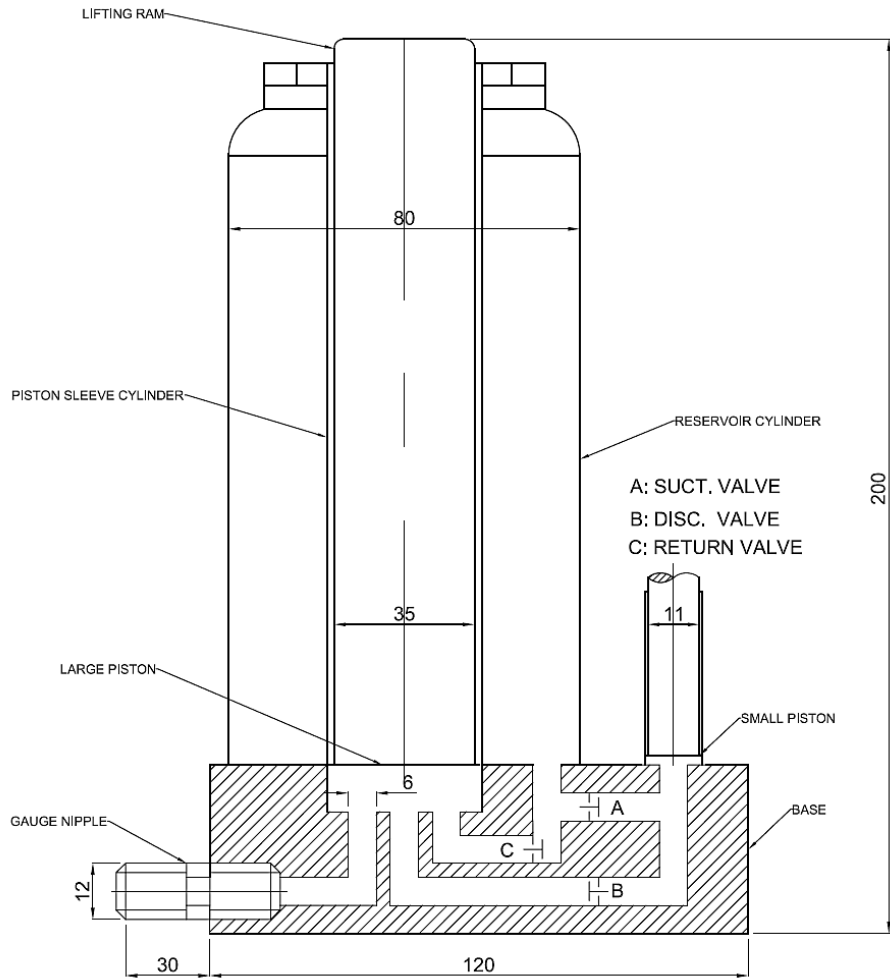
Sectional view of the jack (all dimensions in mm)
